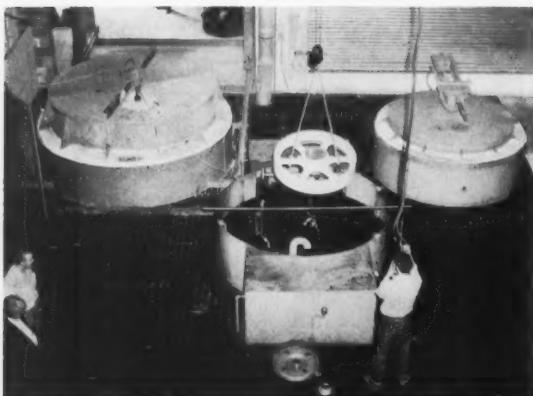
Overhead view showing carburizing furnace in left rear, draw furnace in right rear, and quench system in center. Furnaces were built by Standard American Engineering Co., Chicago, Ill.
